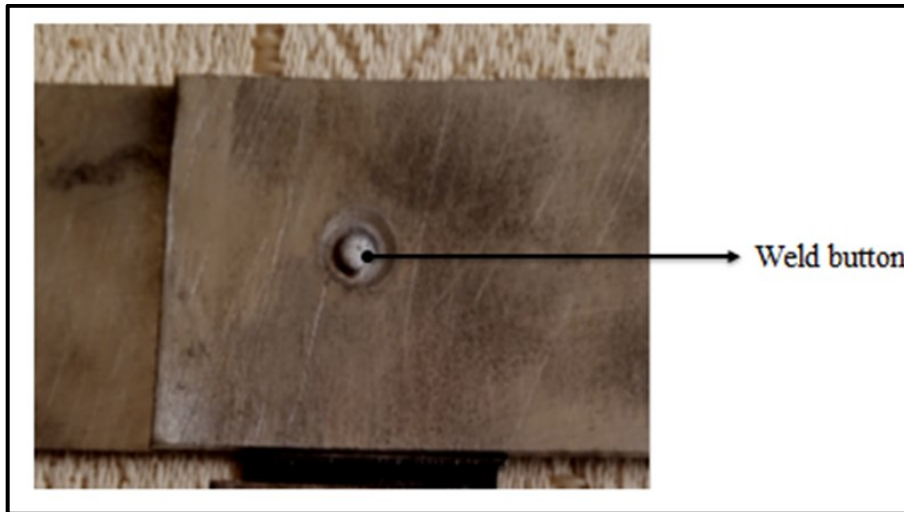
Sample of spot welded workpiece used in this study
